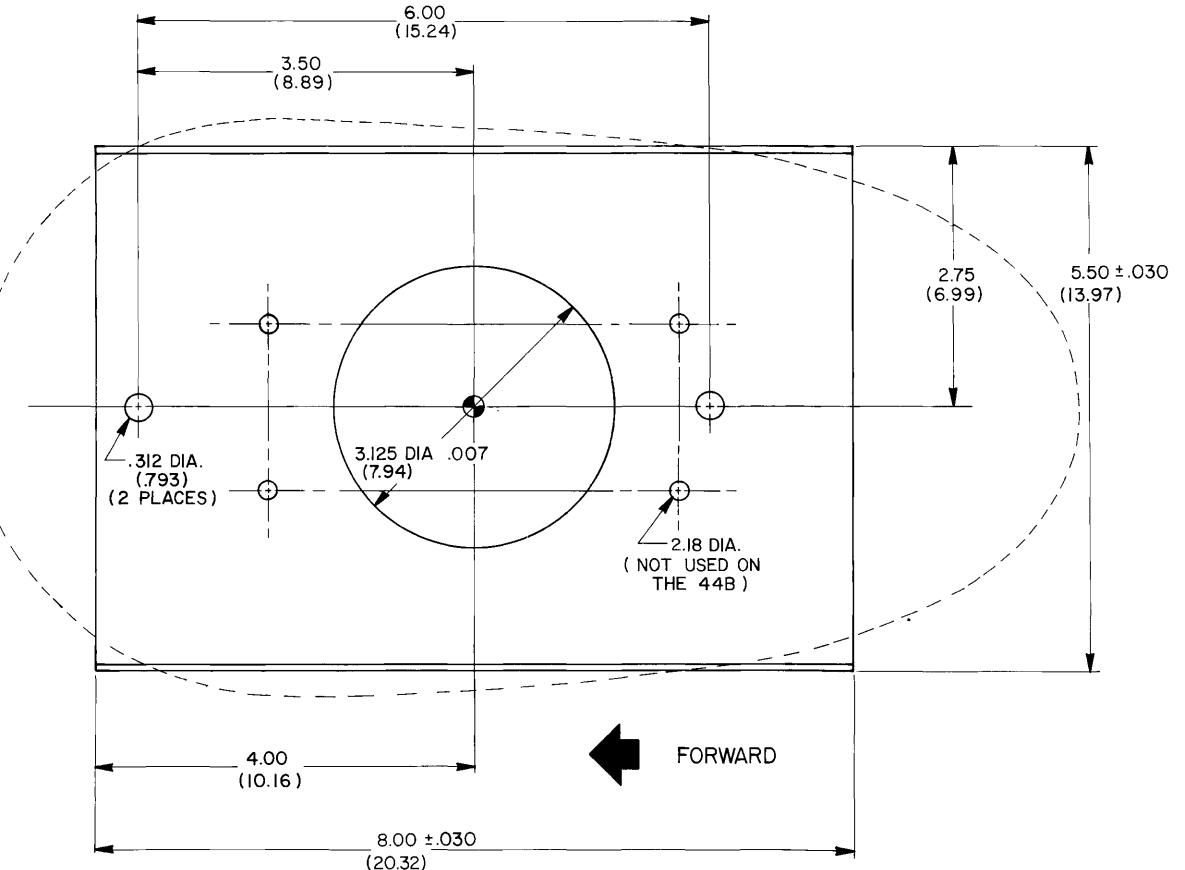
KTR 2280 BAR CLAMP ASSEMBLY DRAWING
